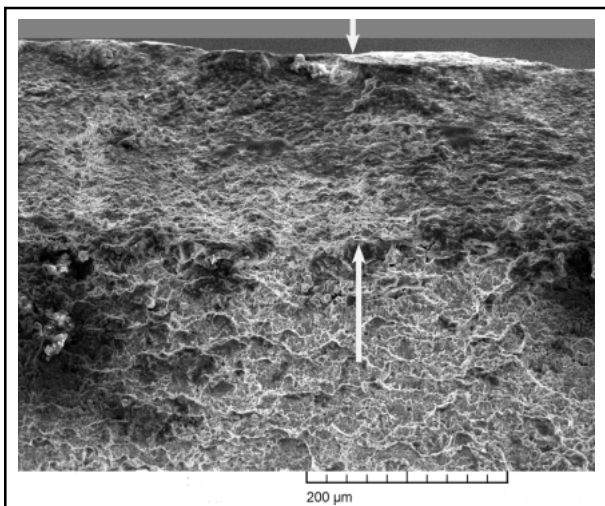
More detail of the old crack (arrows) shows a rusted surface compared with fracture next to it.
